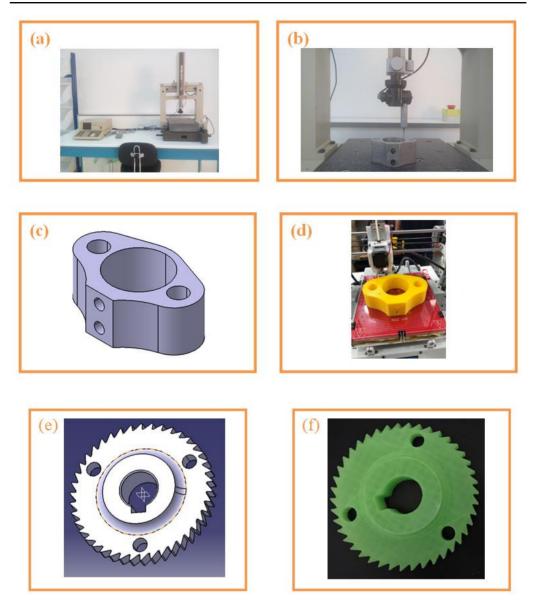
The manufacturing process: (a) MMT MXF 203 three-dimensional measuring machine (University of M'sila), (b) CMM probe, (c, e) reproduce the geometric shape on CATIA V5, (d, f) 3D printing.
